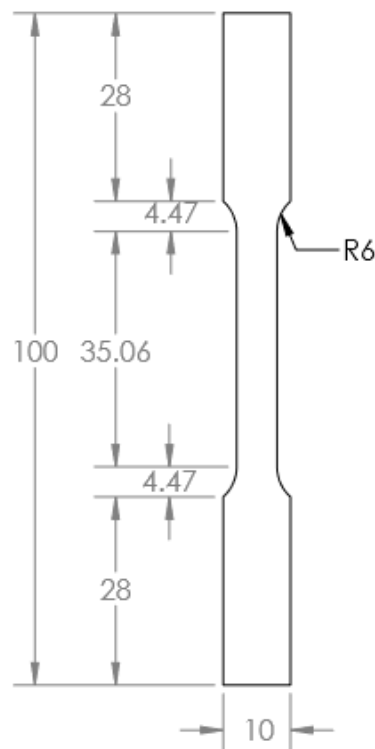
(a) Tensile test specimen with dimensions.
